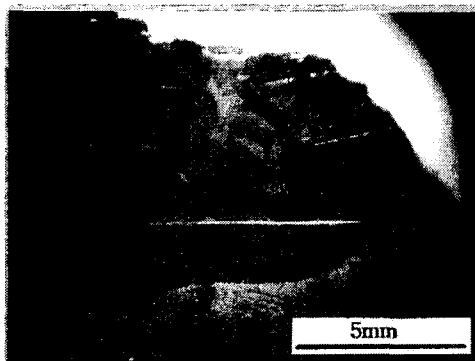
Photograph of surface welded by WC-12%Co grits
